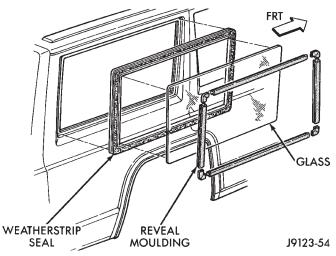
Quarter Window Reveal Moulding, Glass and Seal
